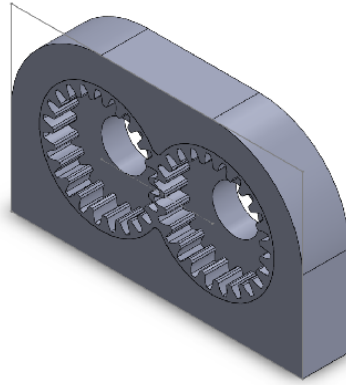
Numerical Model of Gearbox (Half of Gearbox Geometry)
